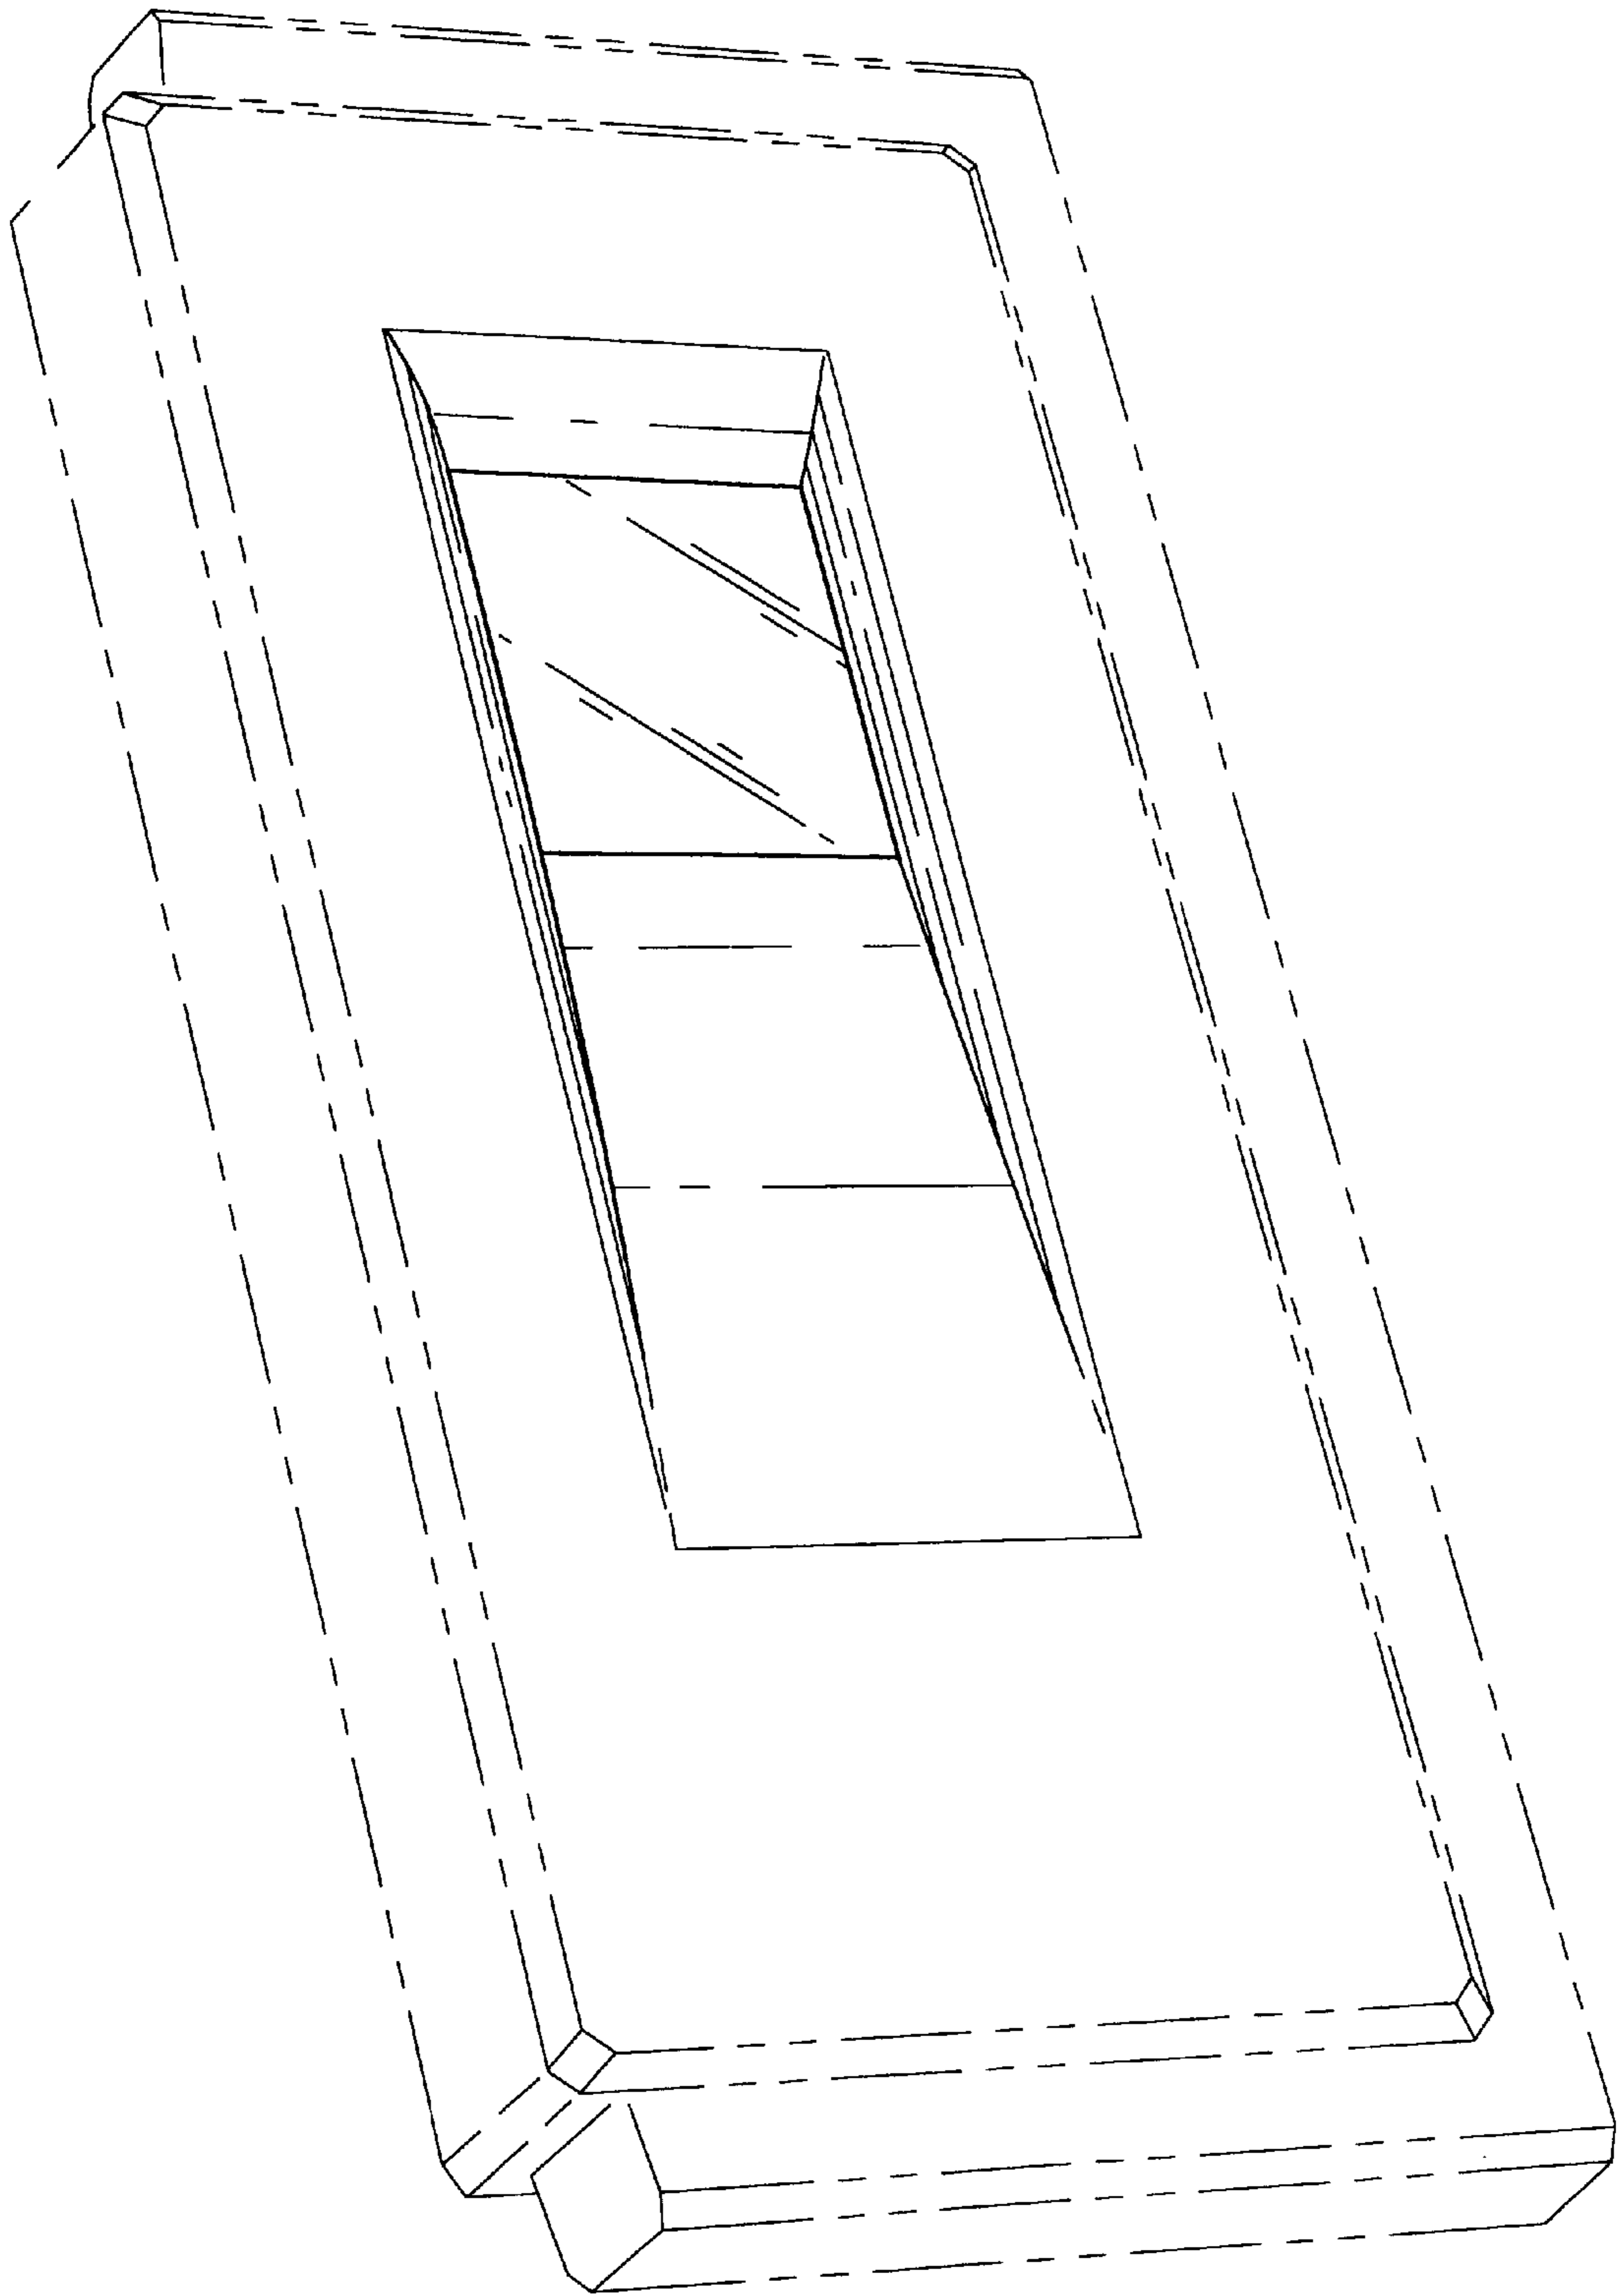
is a perspective view of an indented portion of a processor package cover plate; and, FIG. 2 is a front view thereof.
